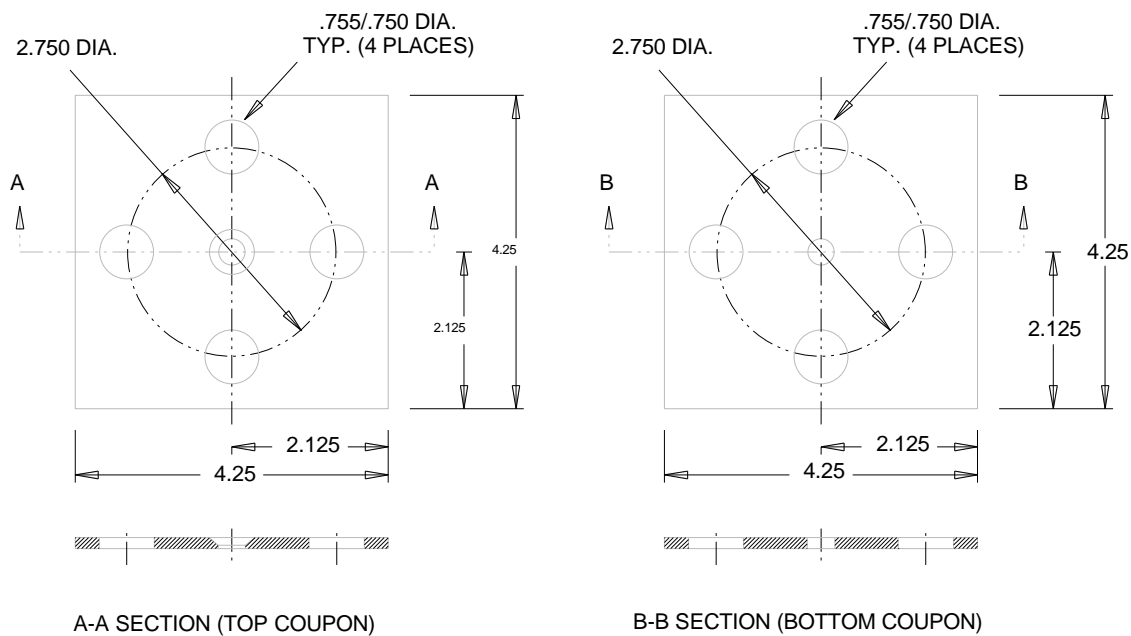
(c) *Fastener pull-thru test fixture.
